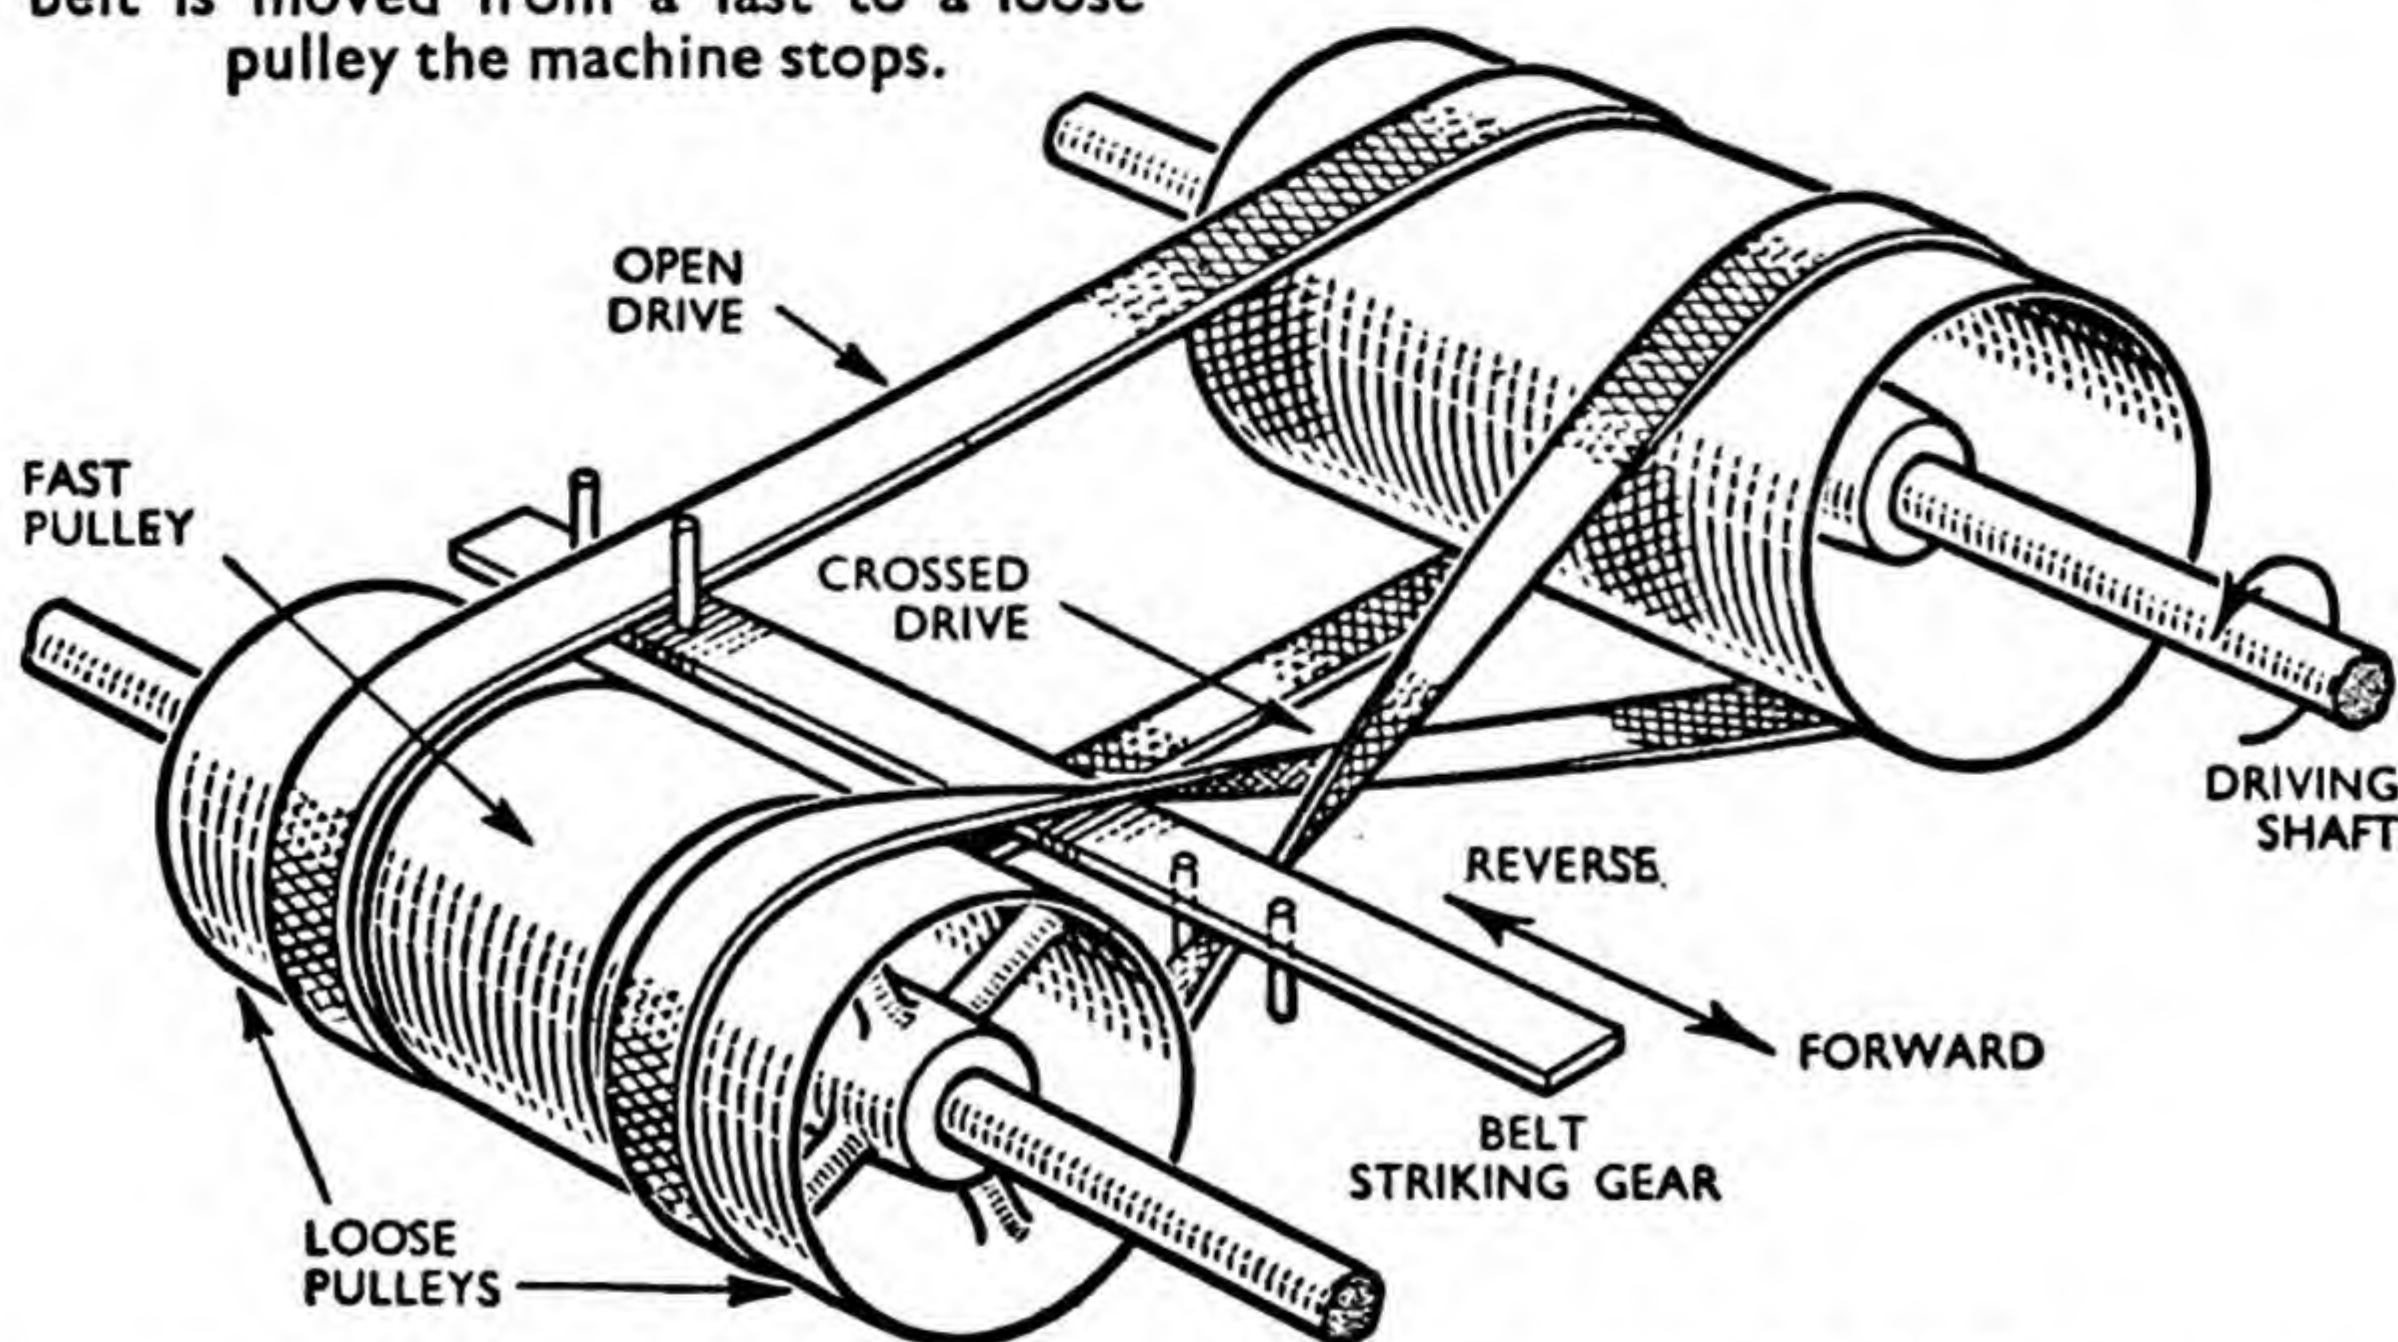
When several machines are driven from lineshaft, loose pulleys permit any one machine to be stopped without stopping the lineshaft. Machines are provided with fast pulleys keyed to the shaft, and loose pulleys turning freely on bushes. If a belt is moved from a fast to a loose pulley the machine stops.
